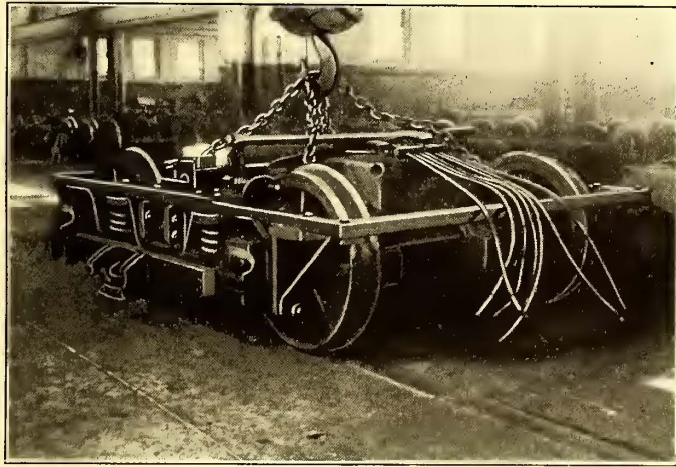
LIFTING TRUCKS BY HOOKS IN MOTOR CASINGS
